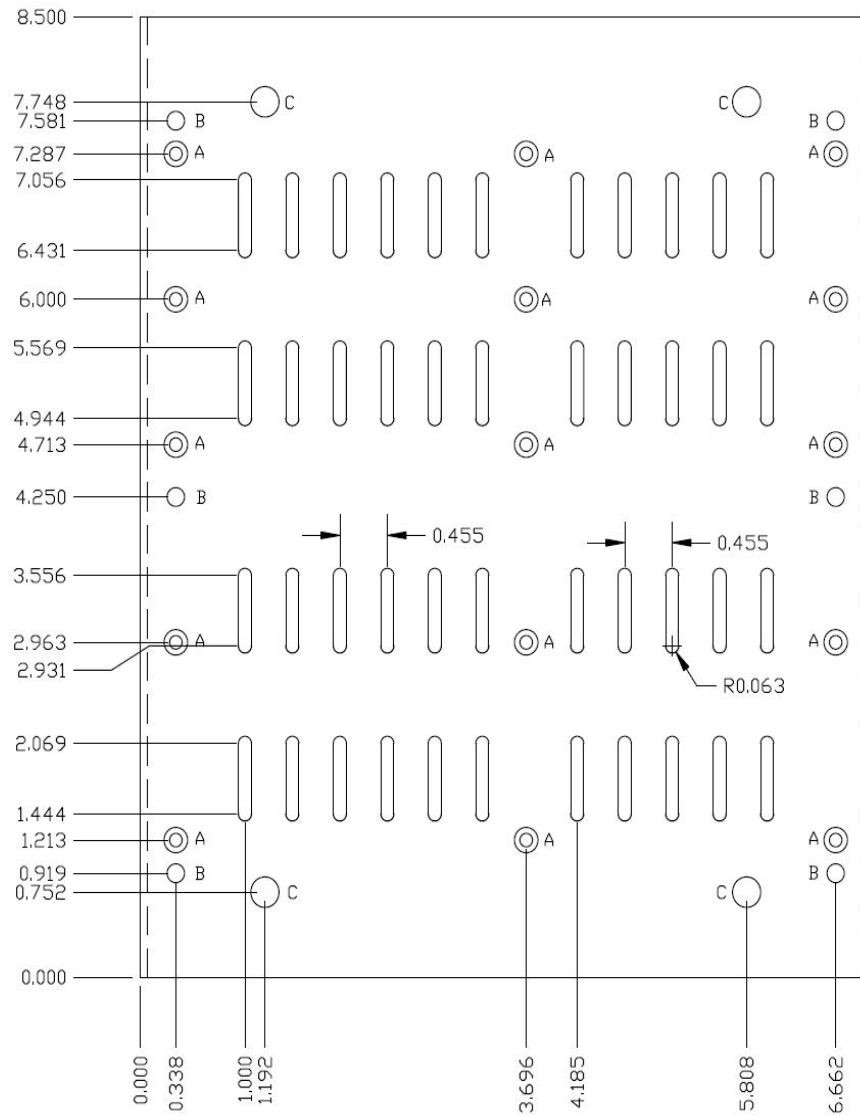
Dimensions of P330 Enclosure, Bottom view.
